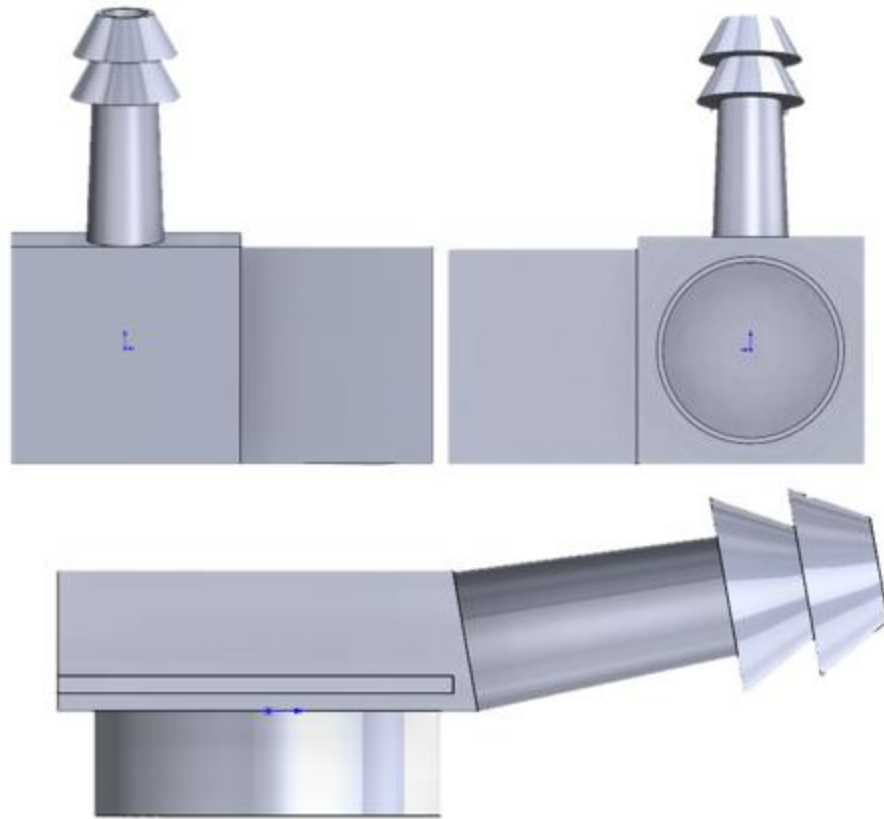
Custom tube fitting for hollow fiber prototype.
